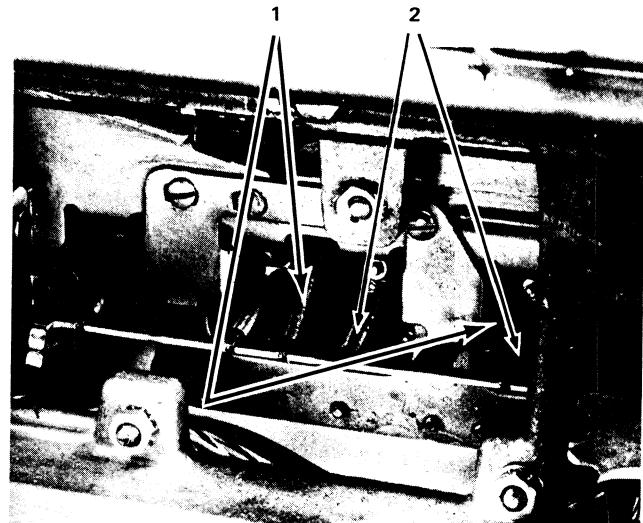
Tilt Selection Differential Removal (Rear of Printer, Motor Removed)
